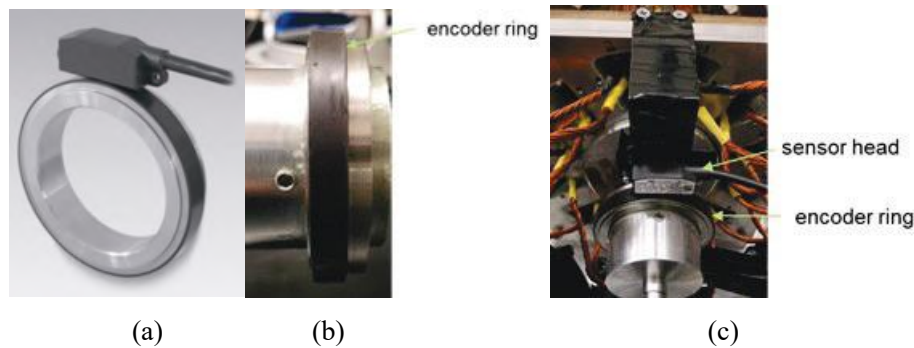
Incremental Bearingless Encoder Installation (a) Baumer ITD69H00, (b) Encoder Ring Installed on motor shaft, (c) Shaft mounted encoder ring with sensor head mounted to motor frame.
